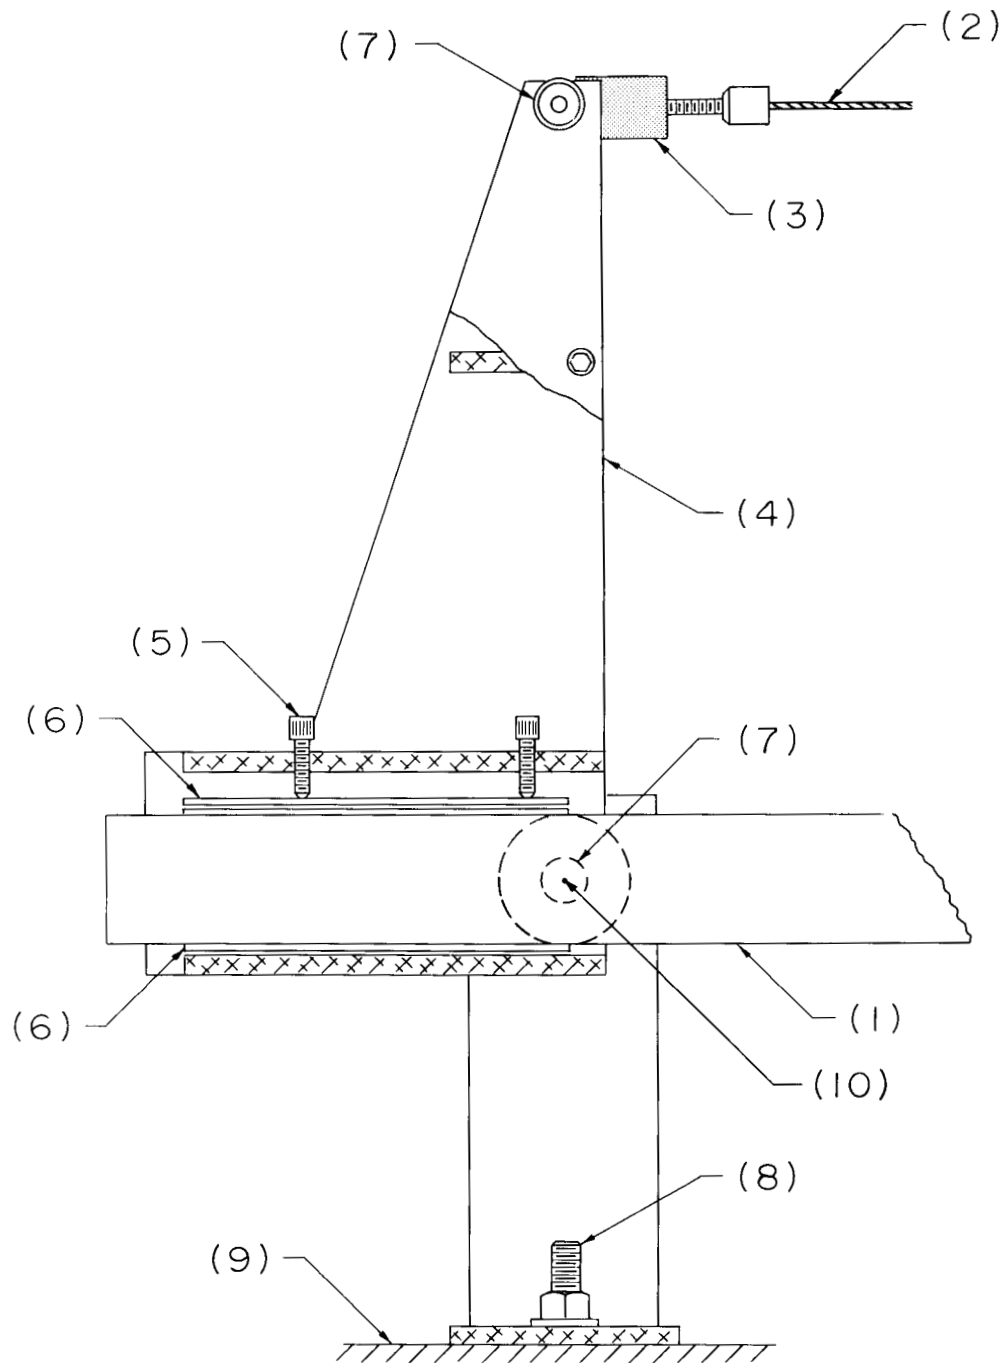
Details of a lever assembly: (1) test specimen, (2) cable, (3) tension load cell, (4) lever, (5) clamping bolt, (6) clamping plates and thrust bearings, (7) ball bearing, (8) anchoring bolt, (9) testing machine bed, (10) nail driven in the specimen.
